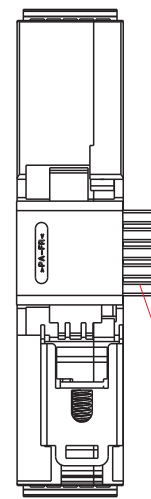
View rear side, MSC7602 inclusive DIN rail bus connector
